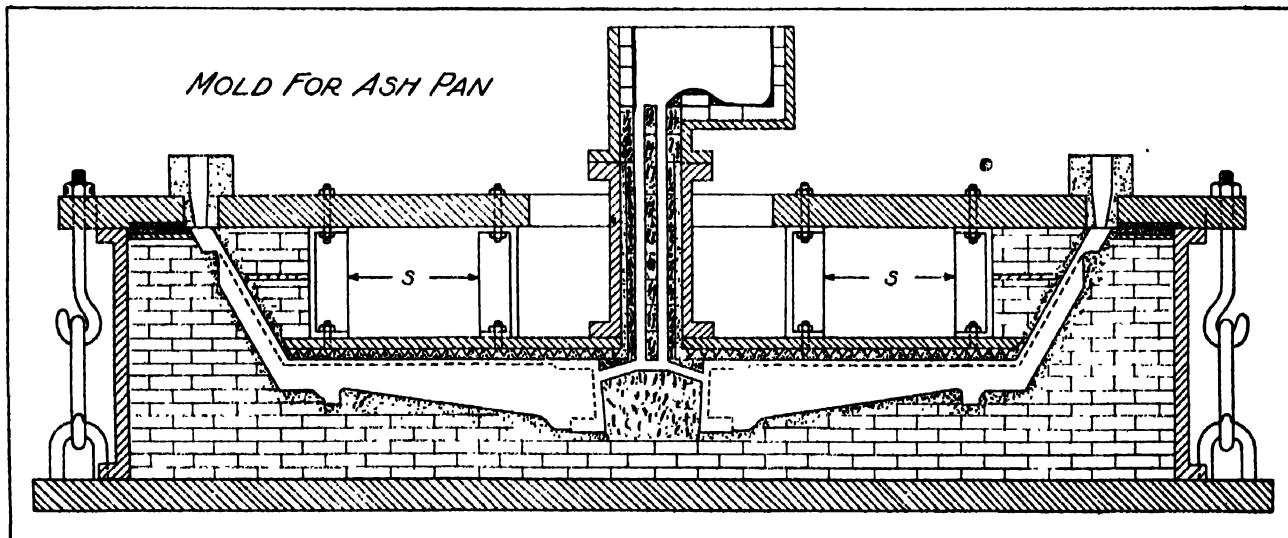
SECTIONAL DRAWING SHOWING THE MOLD ASSEMBLED READY FOR POURING THE STANDARDS SHOWN AT S-S UNDER THE LIFTING PLATE
